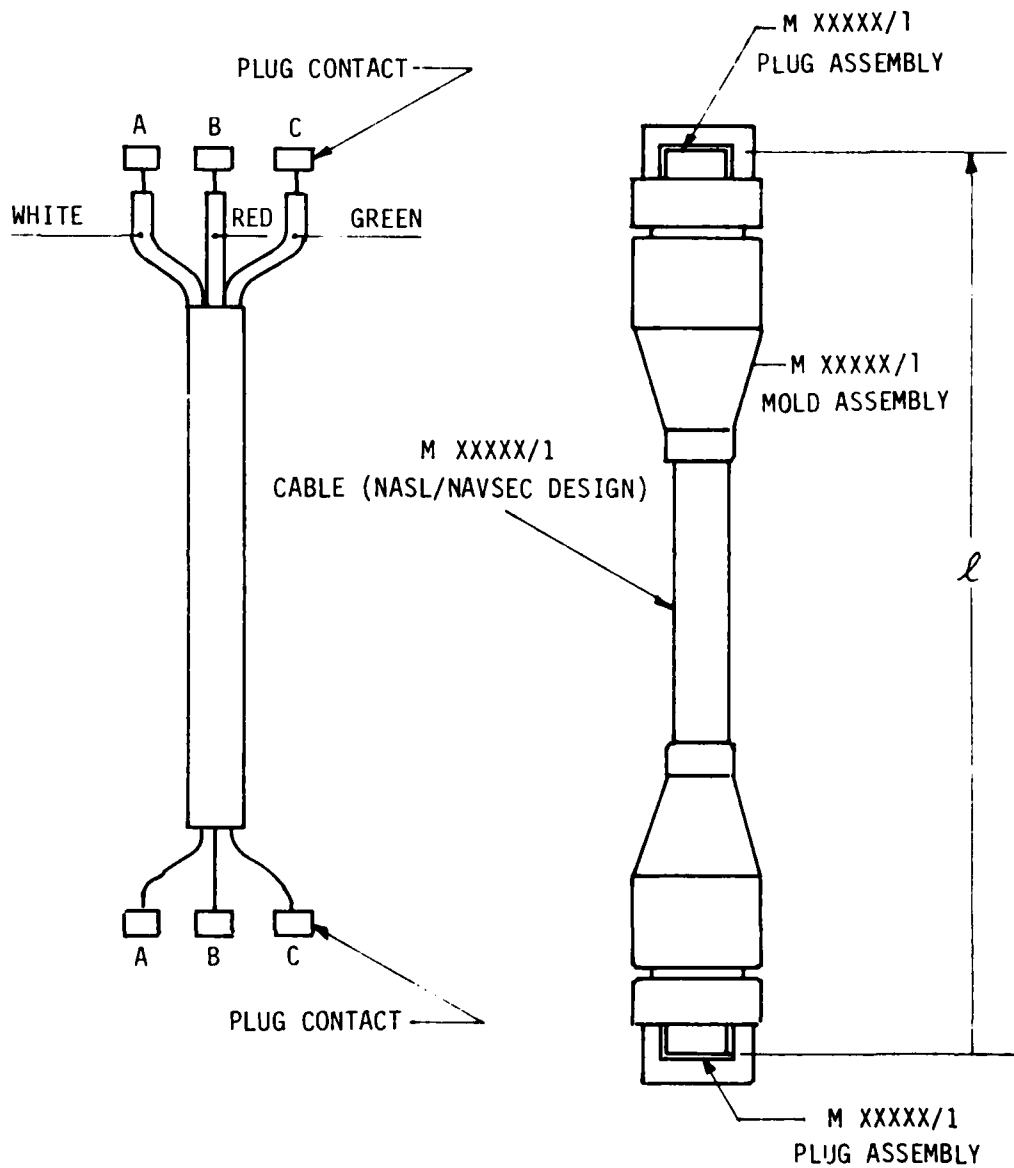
TYPICAL CABLE HARNESS SPECIFICATION SHEET
